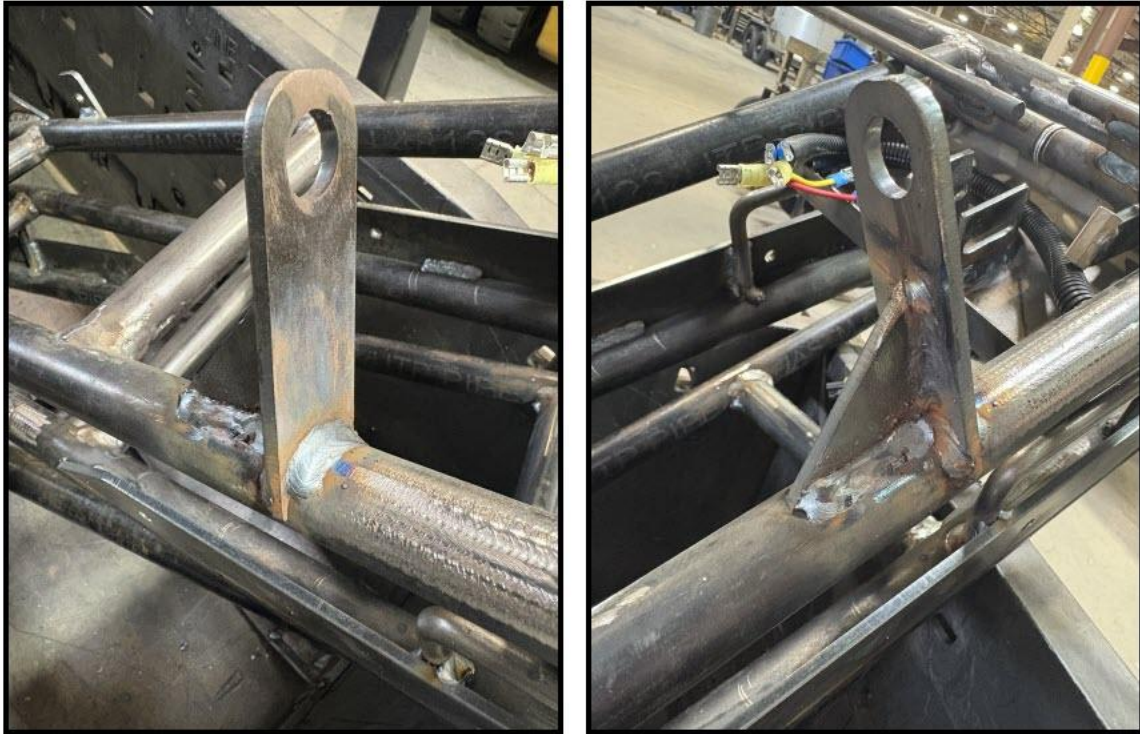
Cable Bracket and Gusset Welds
